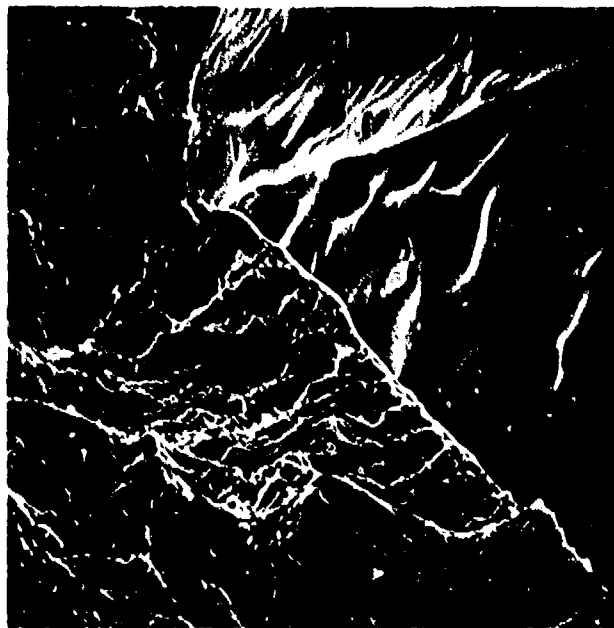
Fatigue initiation site on the fracture surface of an A-514 weldment containing porosity, 1380x.
